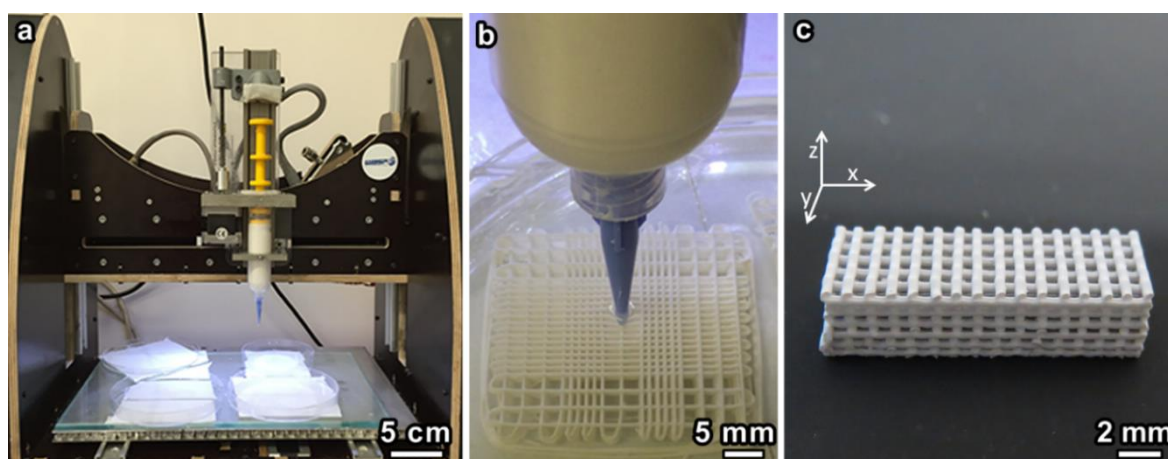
Photographs of a) the 3D-printer equipped with syringe for silicone-based ink; b) detail of the printing process carried out in oil bath; c) overview of a 3D-printed scaffold with orientation of the axes.
